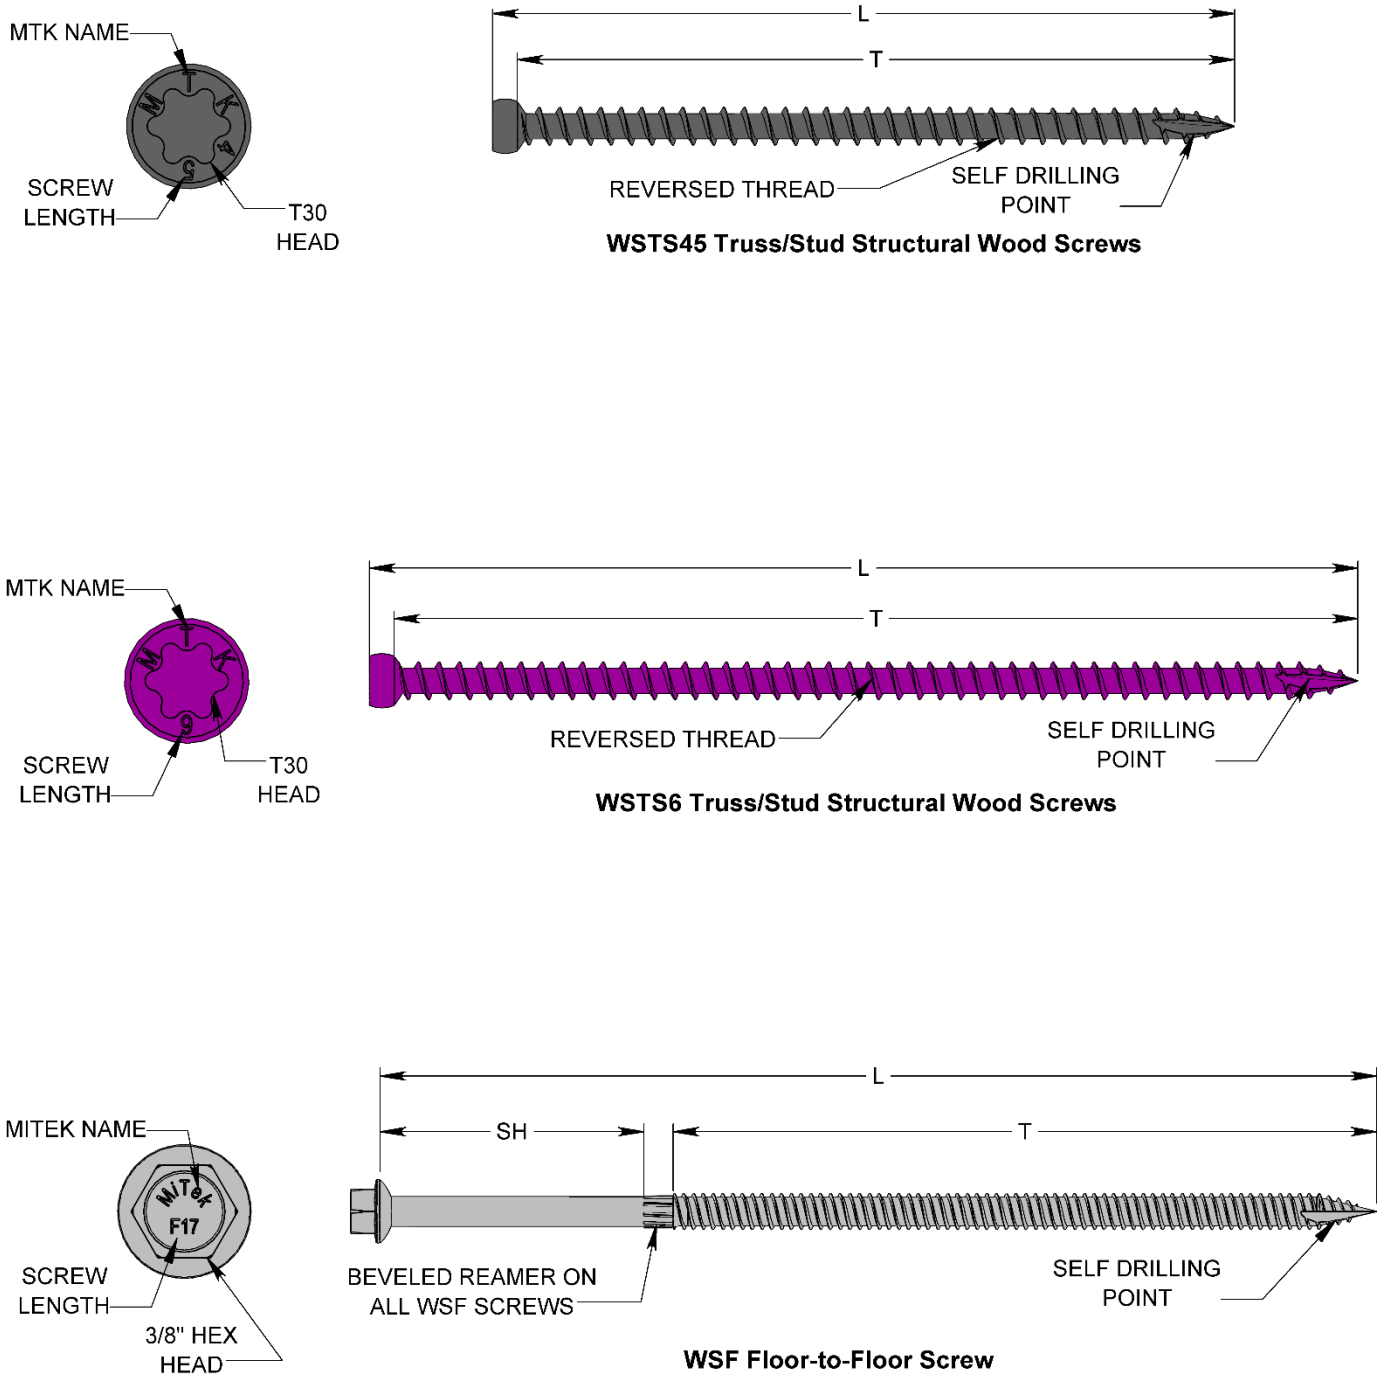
B—WSTS AND WSF WOOD SCREWS
